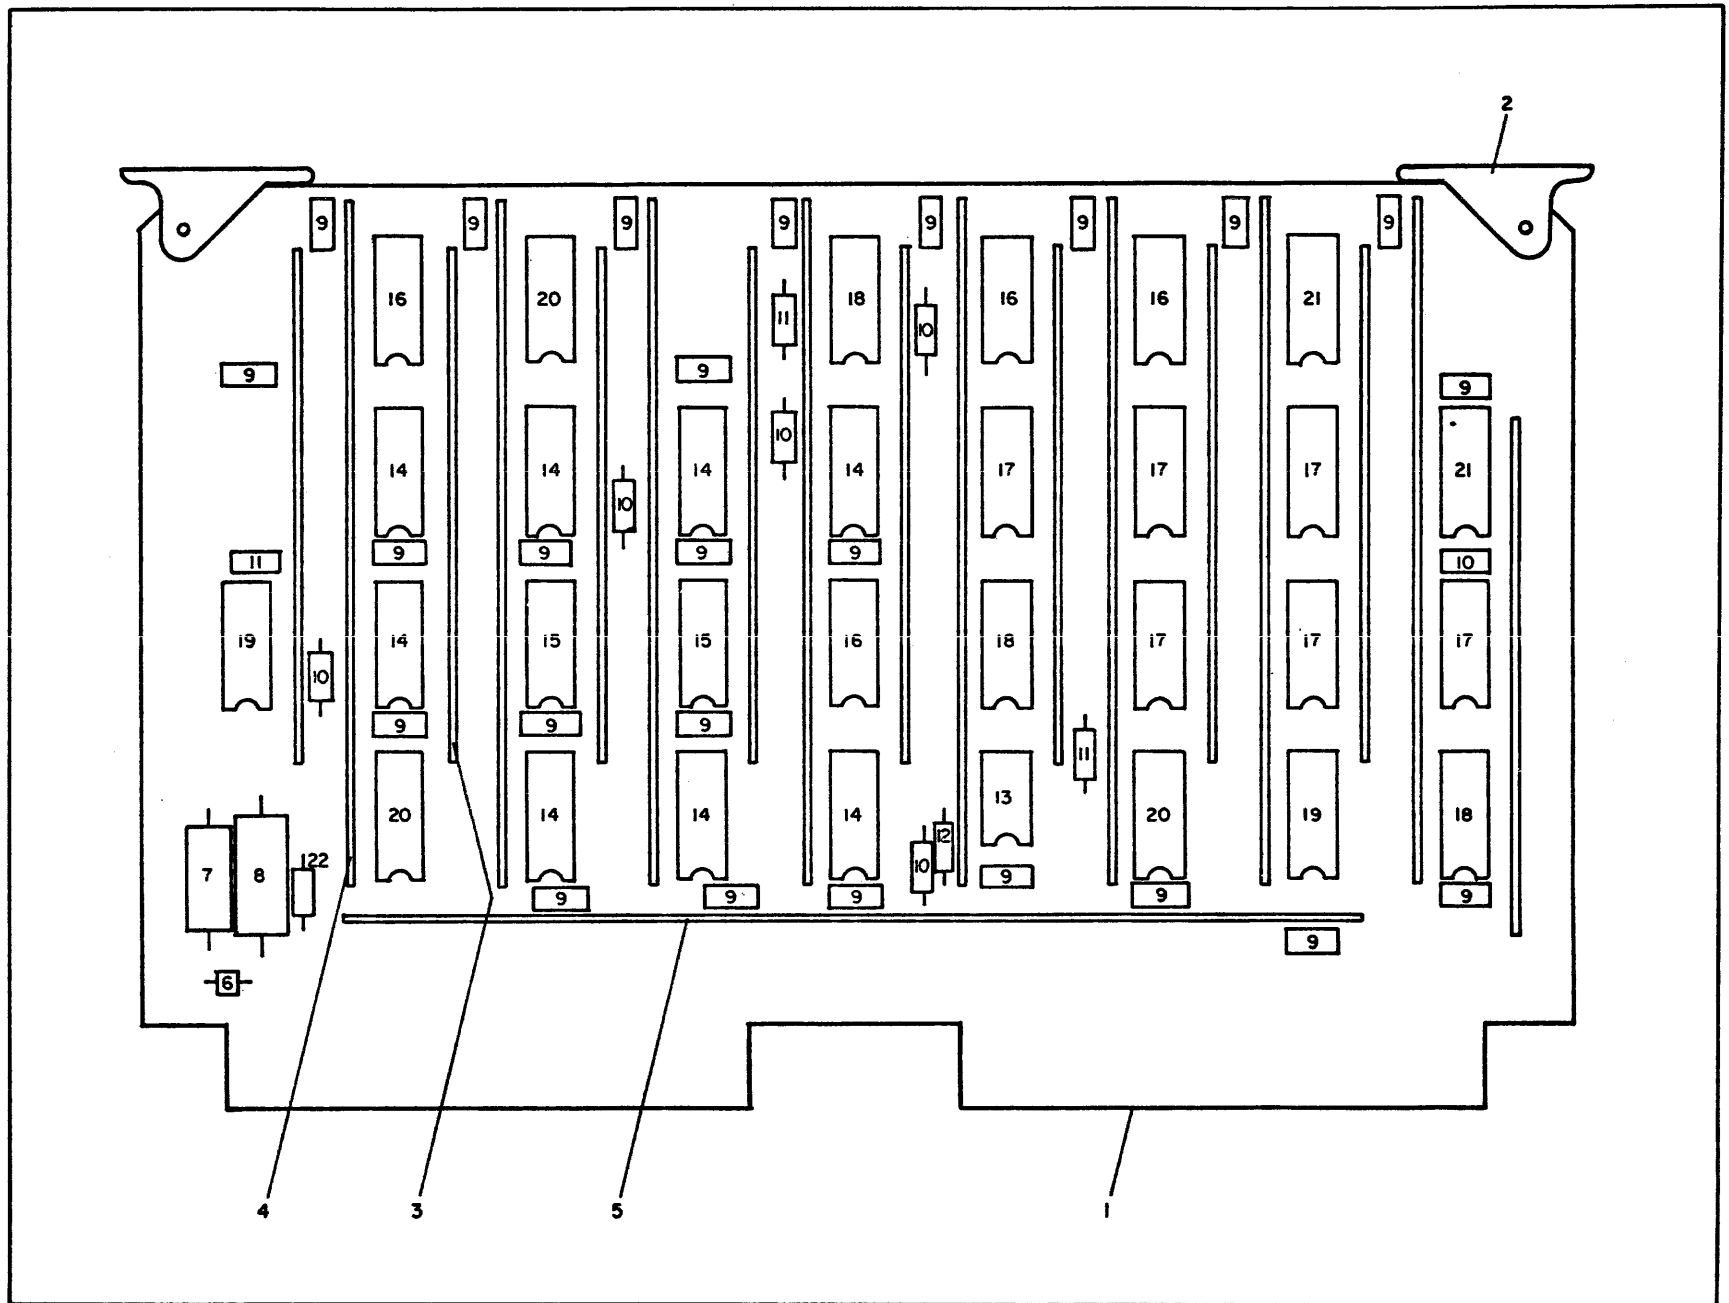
PC ASSEMBLY - SYNC CARD
